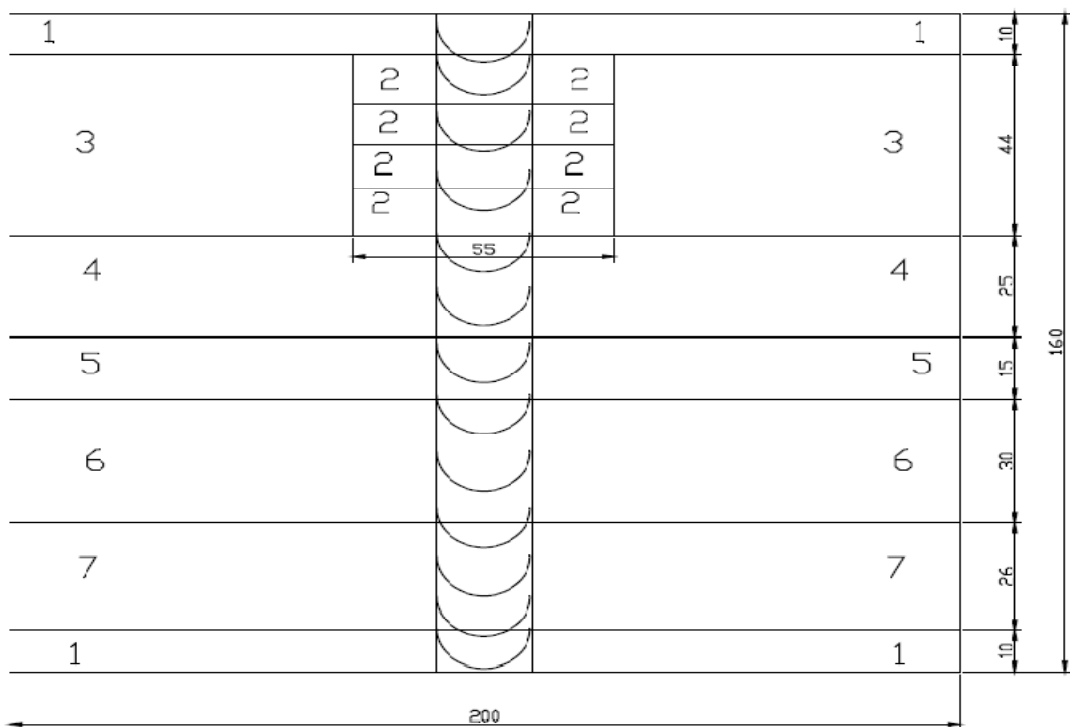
Marking and cutting plan of welded specimens (all dimensions in mm)
